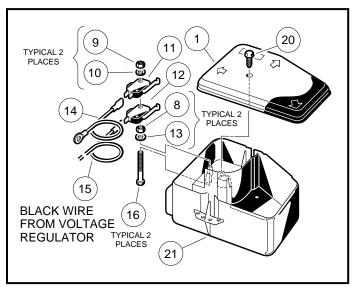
Accelerator Pedal and Kill Limit Switches
